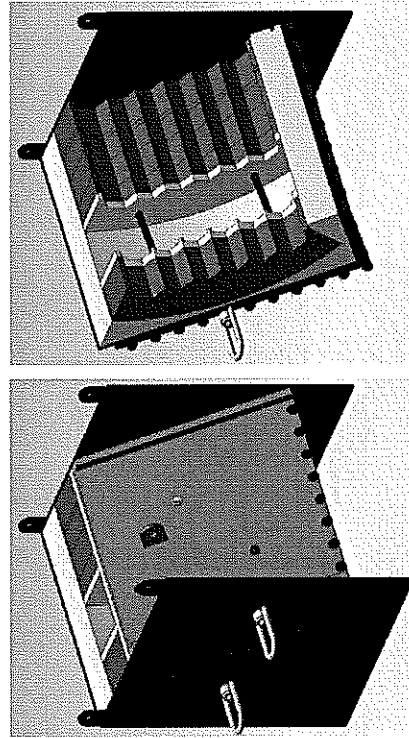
RENDER OF THE PSR MOLD IN THE "LOWER PLENUM UPPER REAR" CONFIGURATION: FULL ASSEMBLY (LEFT) AND FRAME WALL, MOLD CAP, AND INSIDE PLATE REMOVED FOR CLARITY (RIGHT).
